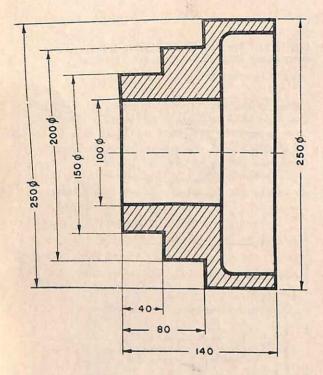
Dimensioning cylindrical parts (IS: 696-1960)
